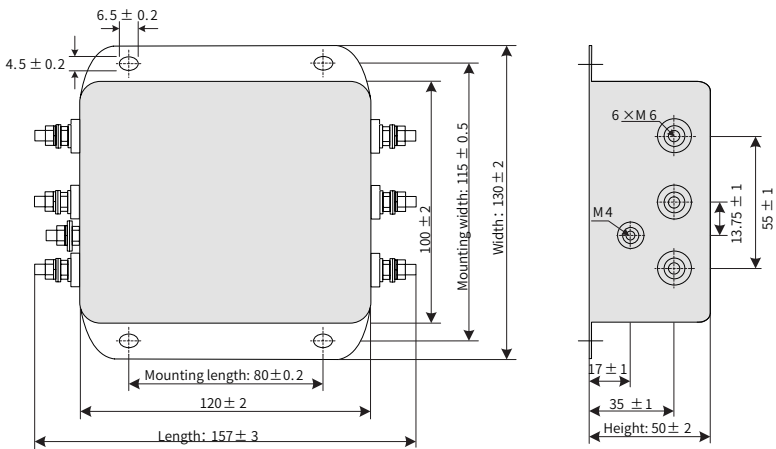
Mounting dimensions of the simple EMC filter (unit: mm)
